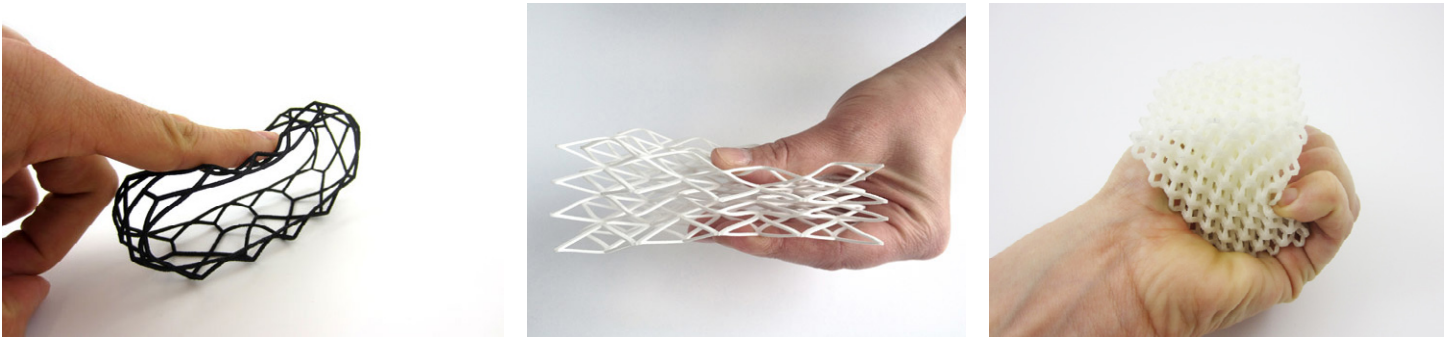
Examples of flexible materials used with 3D printing (in order from left to right [26], [27], [28])
